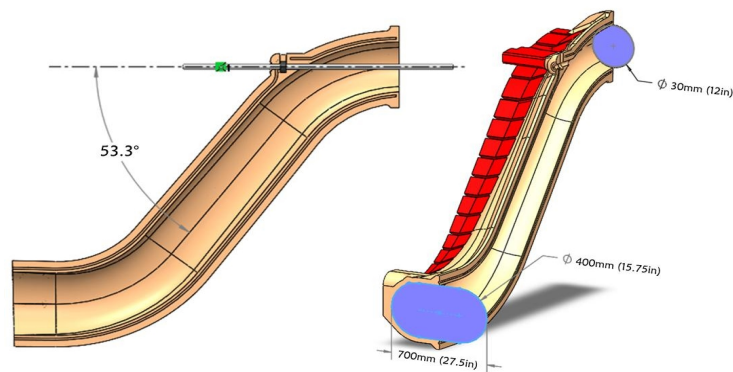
Design of the draft tube showing conveyance angle (left) as well as inlet and outlet dimensions (right).
